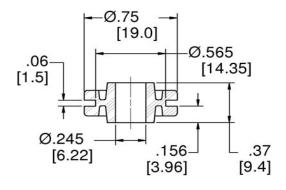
Part Dimensions - J-3112 Series (With Ferrule)
